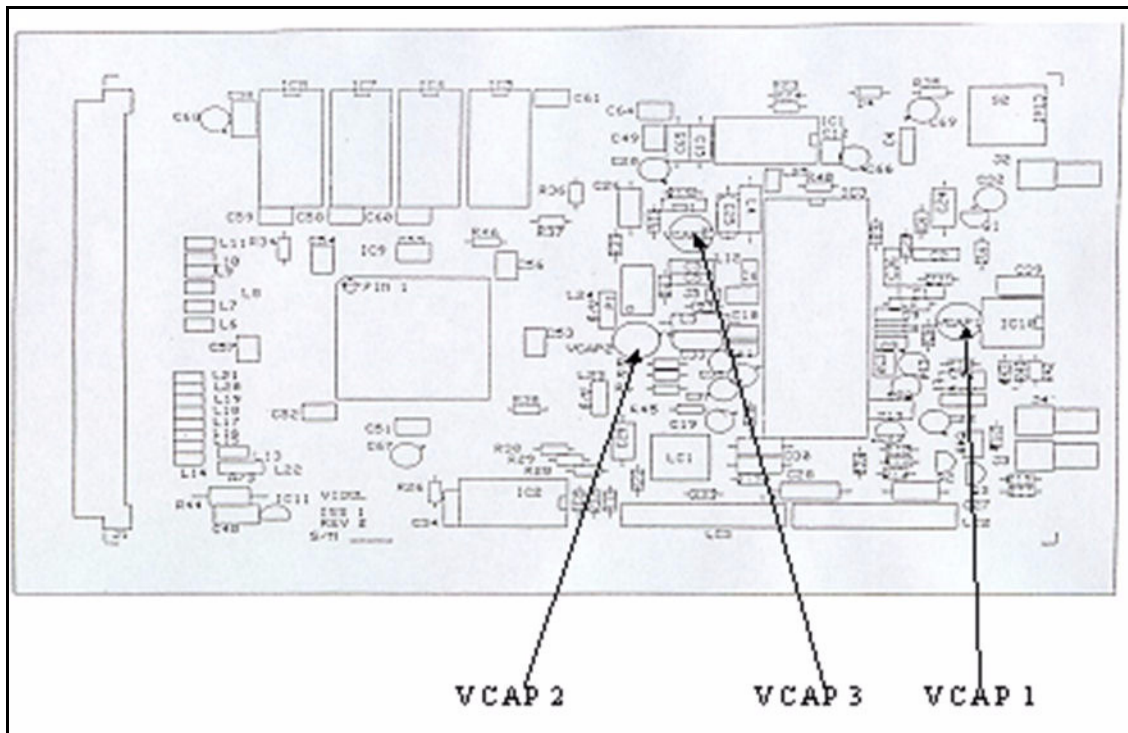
Video Vidol PCB Identifying VCAP 1, 2 and 3
